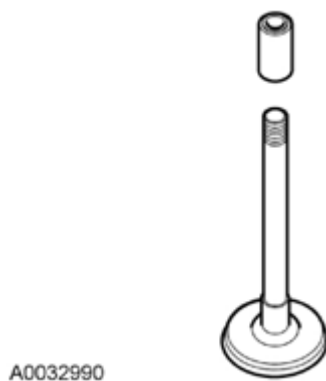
Identifying Valve Stem Seal Installation Sleeve
